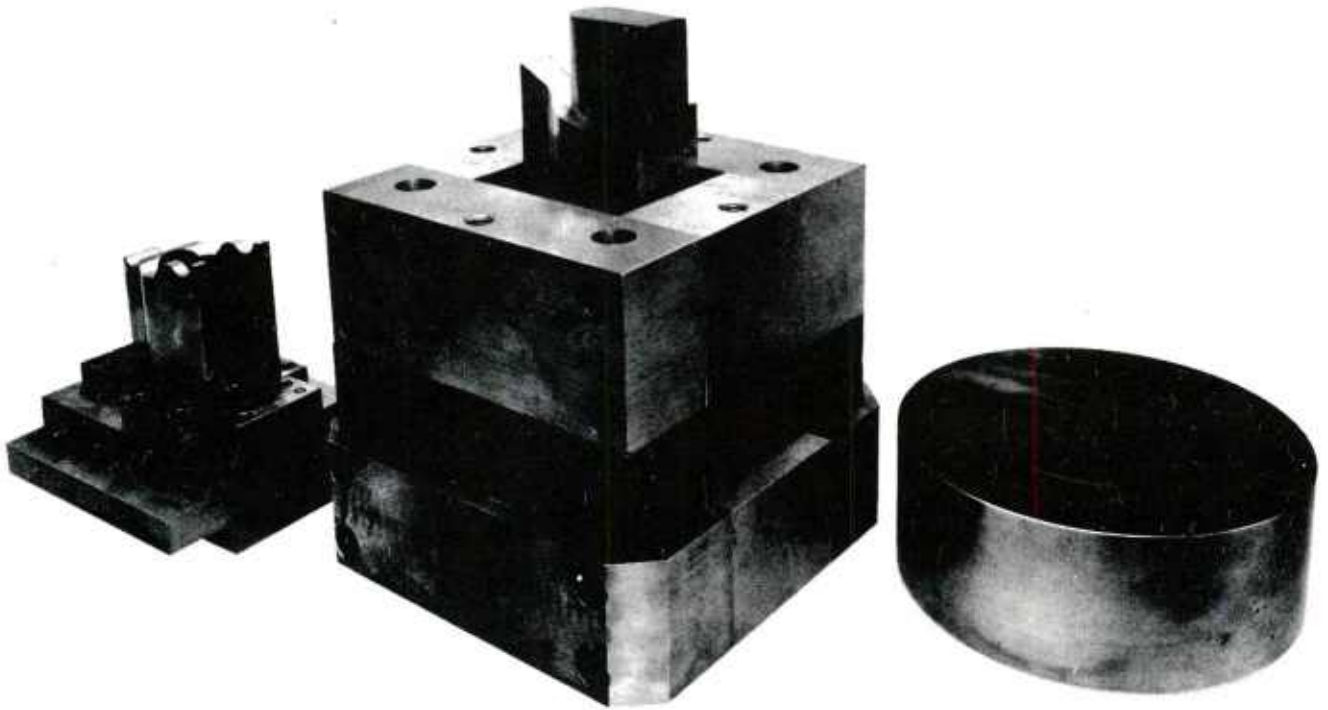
Minimum Deformation Tooling Shown Disassembled Prior to Installation.
